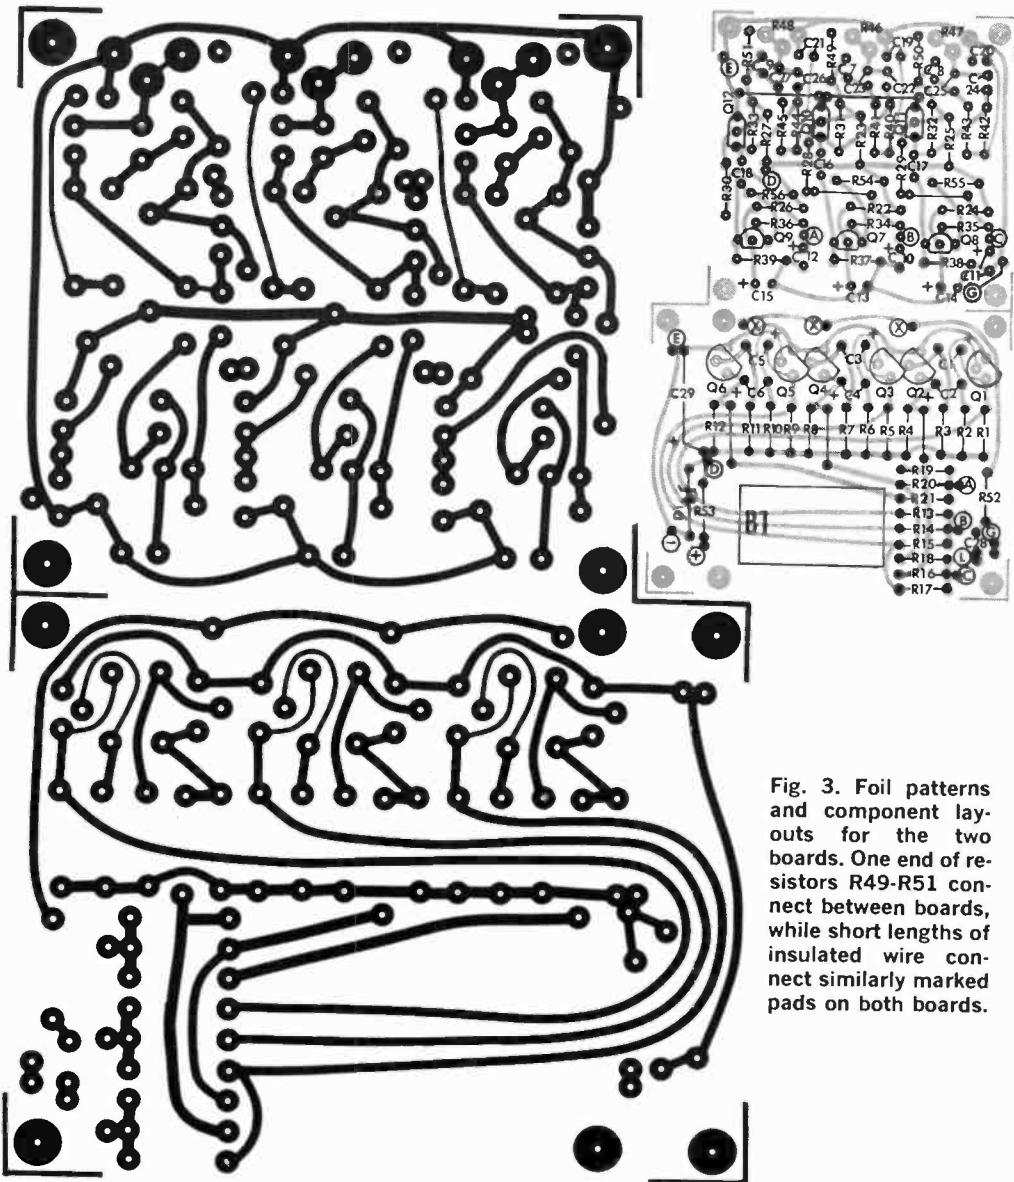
Foil patterns and component layouts for the two boards. One end of resistors R49-R51 connect between boards, while short lengths of insulated wire connect similarly marked pads on both boards.
